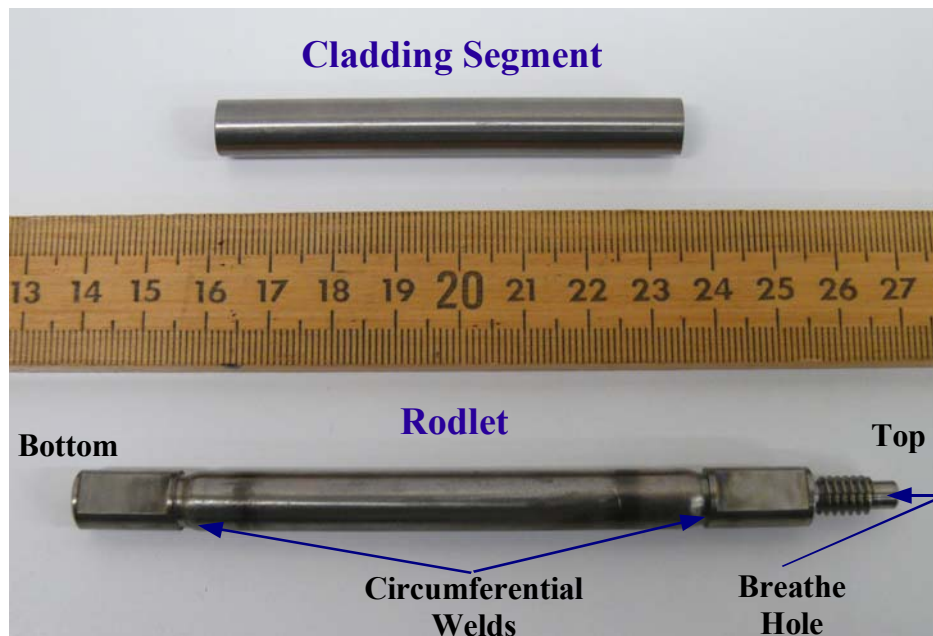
Cladding segment prior to rodlet fabrication (top image) and after rodlet fabrication.
